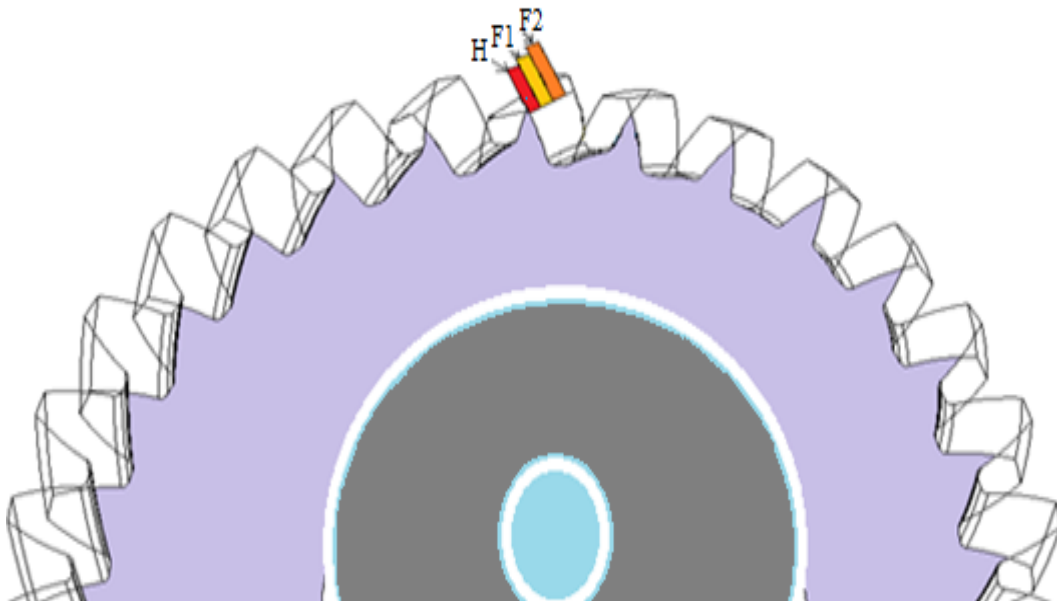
Faulty gear condition, the red colour indicates the healthy tooth (zero tooth removed), yellow indicates the first fault (25% of tooth removed), orange indicates the second fault (85% of tooth removed)
